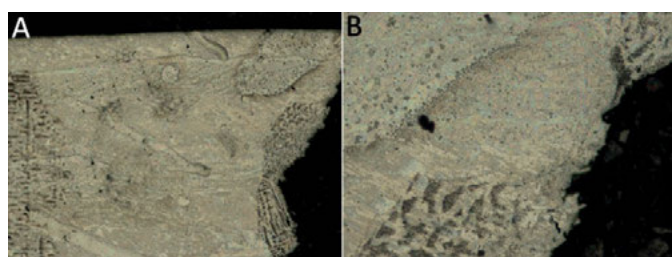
Microscopic images of fractures of laser-welded samples. Sample cross-section at the fracture site A - magn. x 50, B - magn. x 200
